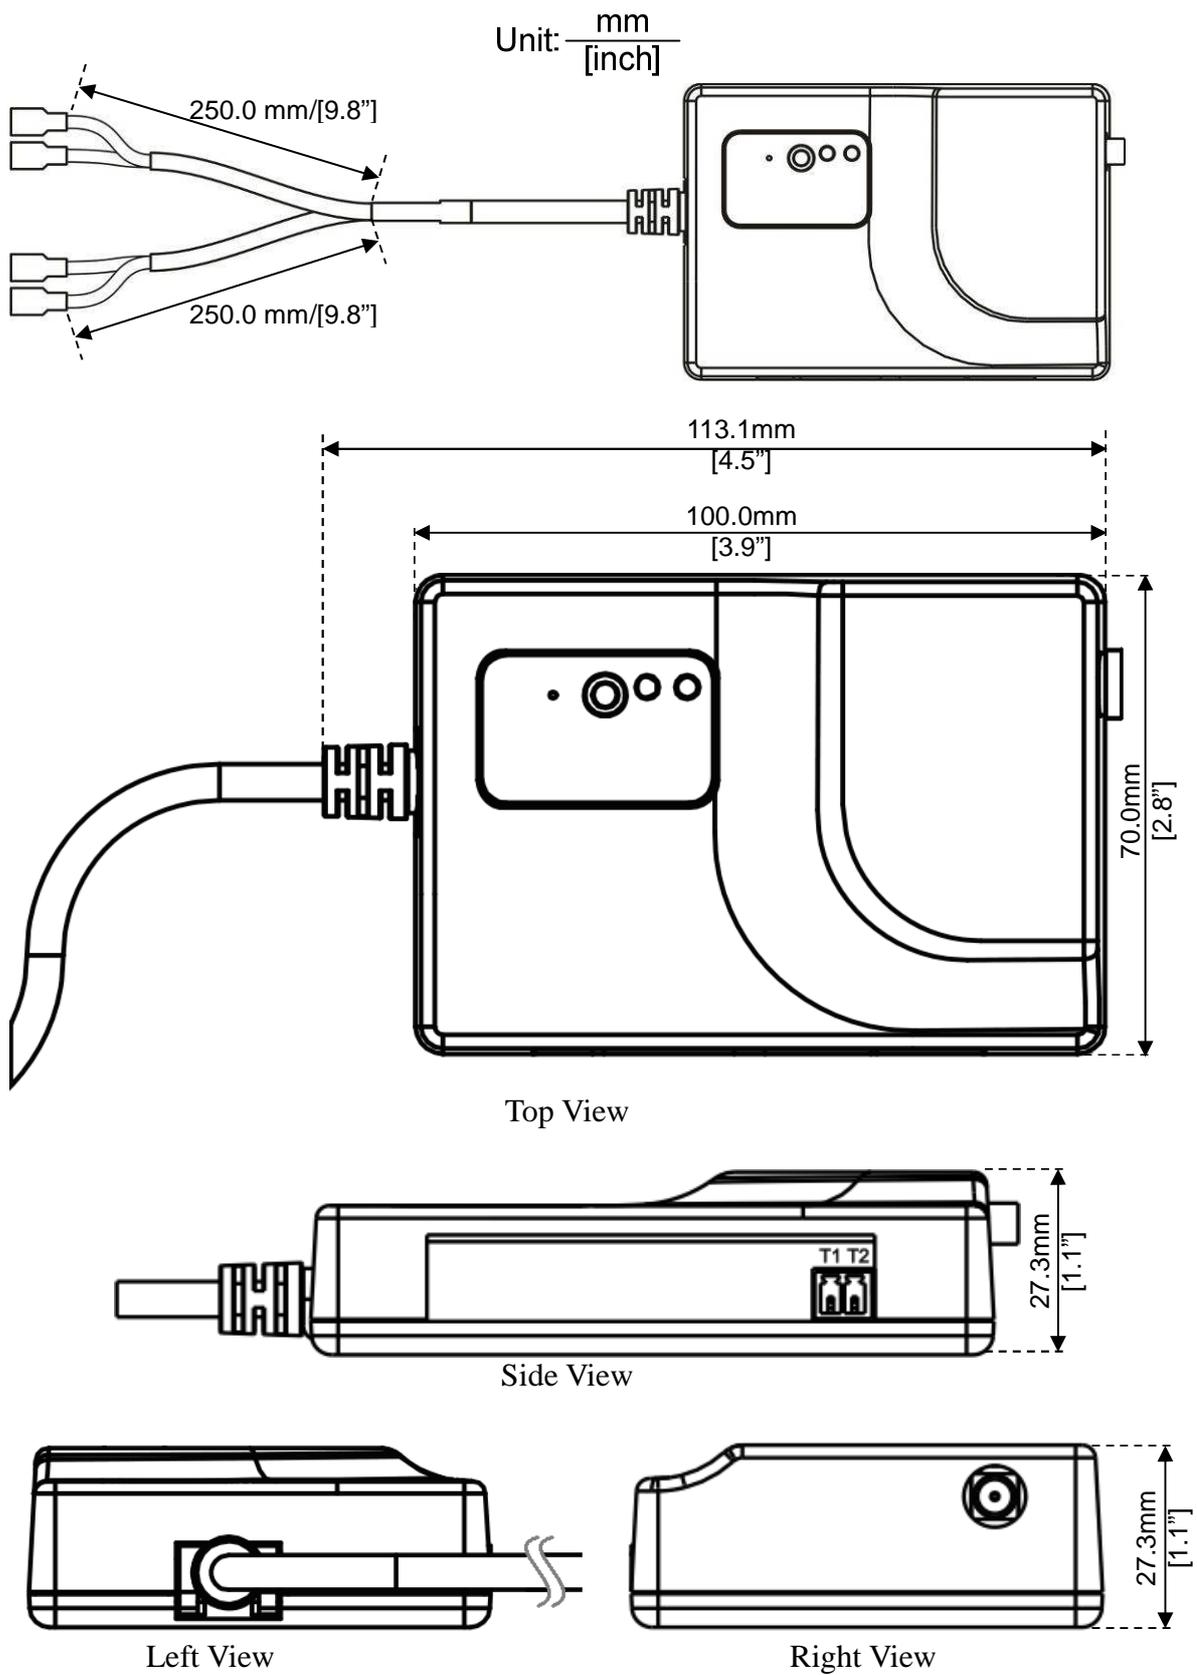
Battery Measure Kit (BMK) Dimension Drawings
